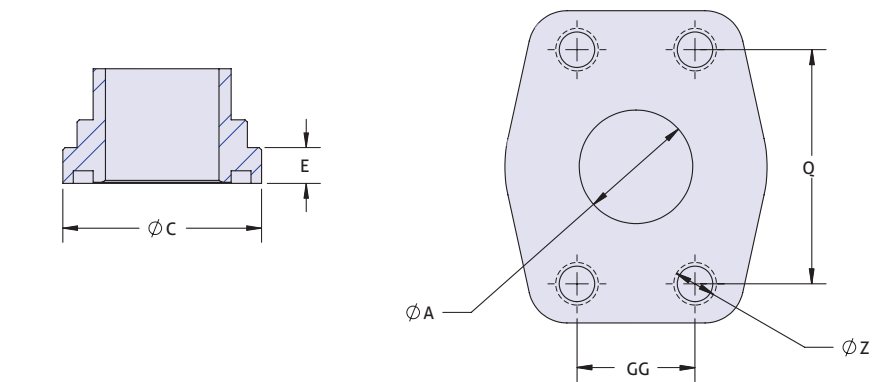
Code 61 and 62 Figures of the flange (Left) and bolt pattern (Right)
